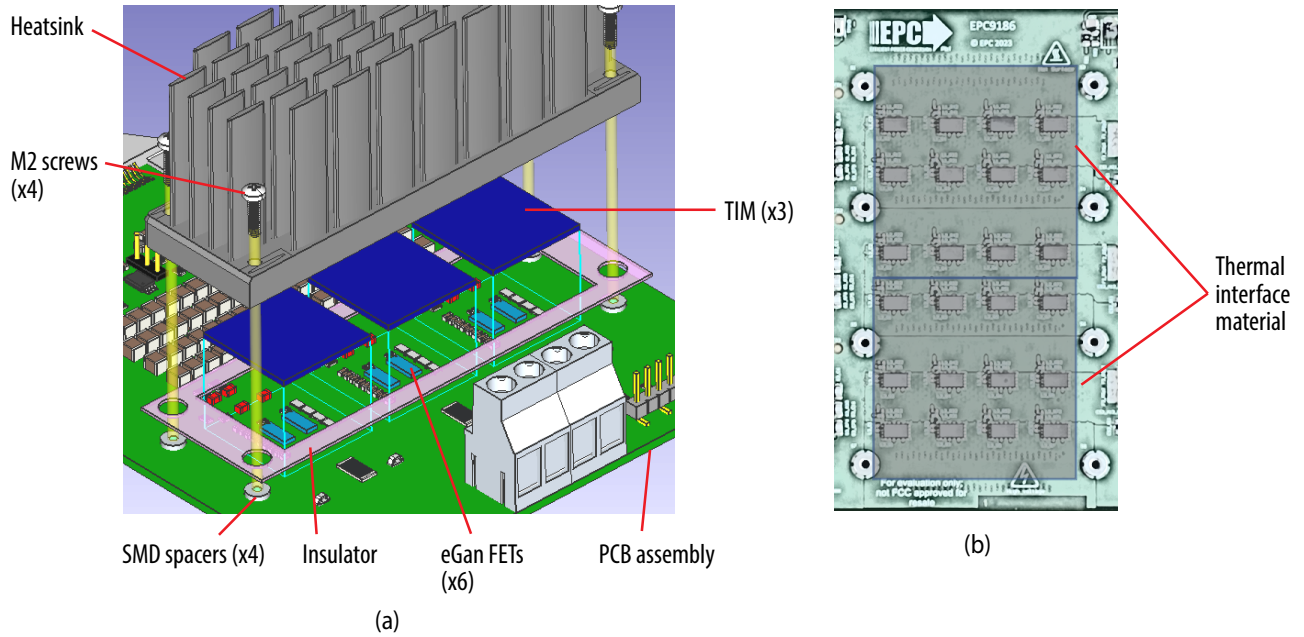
Details for attaching a heatsink to the board. (a) exploded 3D perspective, (b) top view showing the insulator sheet details with opening for the TIM with location of the eGaN FETs
